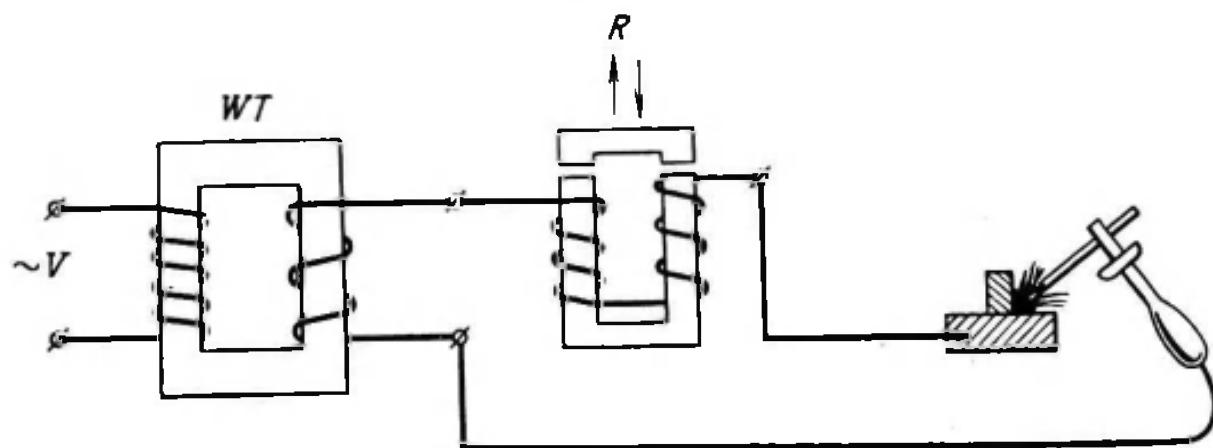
Elementary diagram of a welding transformer
